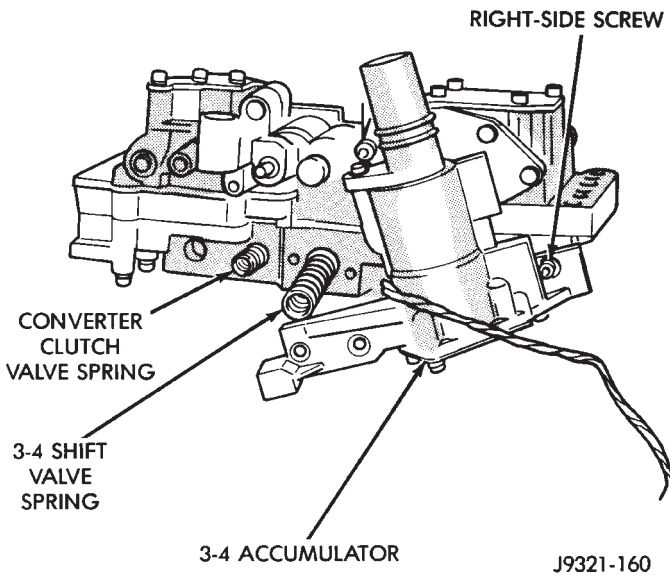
Installing Converter Clutch And 3-4 Shift Valve Springs
